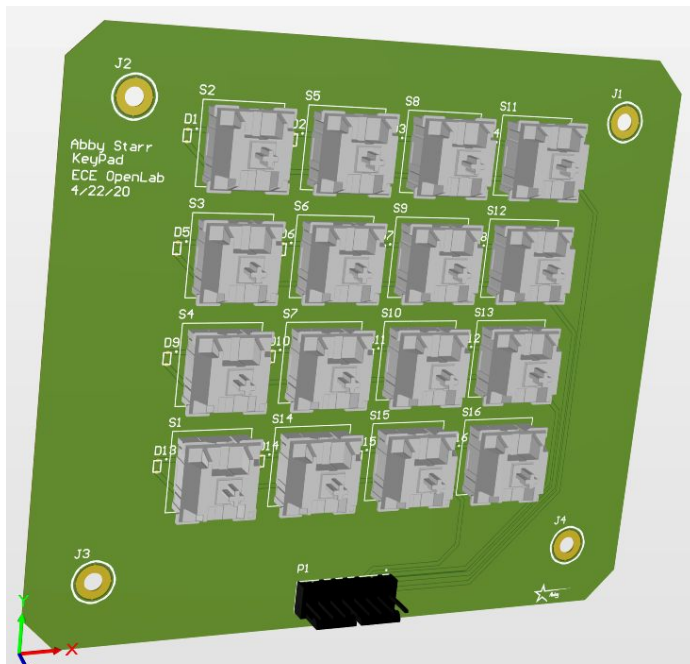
3D Keypad Board Simulated keypad board to show spacing of keys
